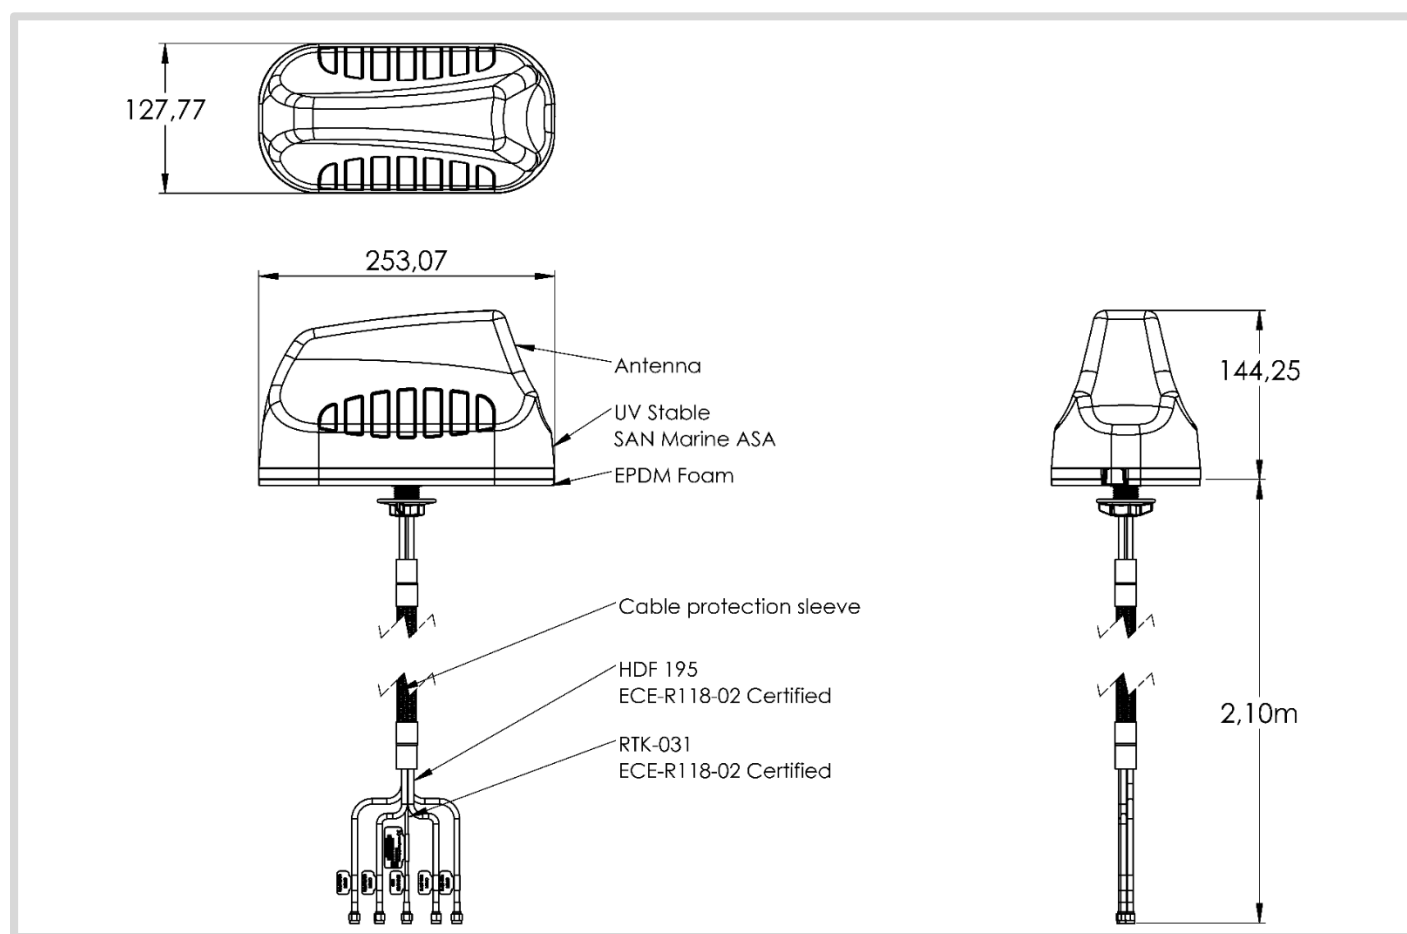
Technical drawing example of the MIMO-0003-V2-15 (with 5x coax cables)
